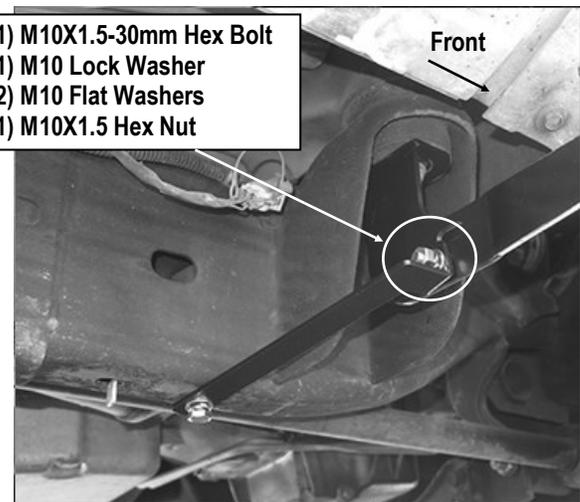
Passenger Front Support Bracket (PFS) Installation
